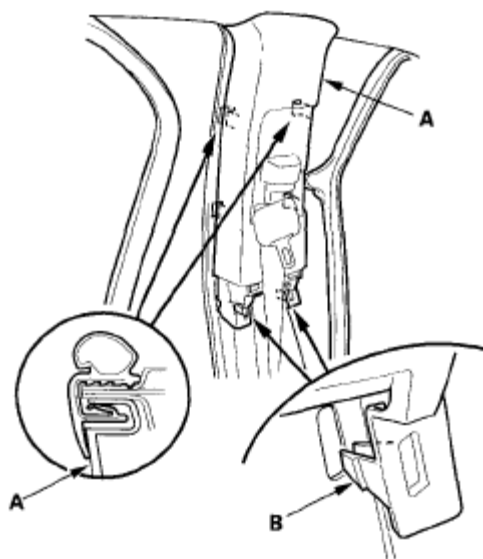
Detaching Lower Hooks Pulling Bottom Of B-Pillar Upper Trim
